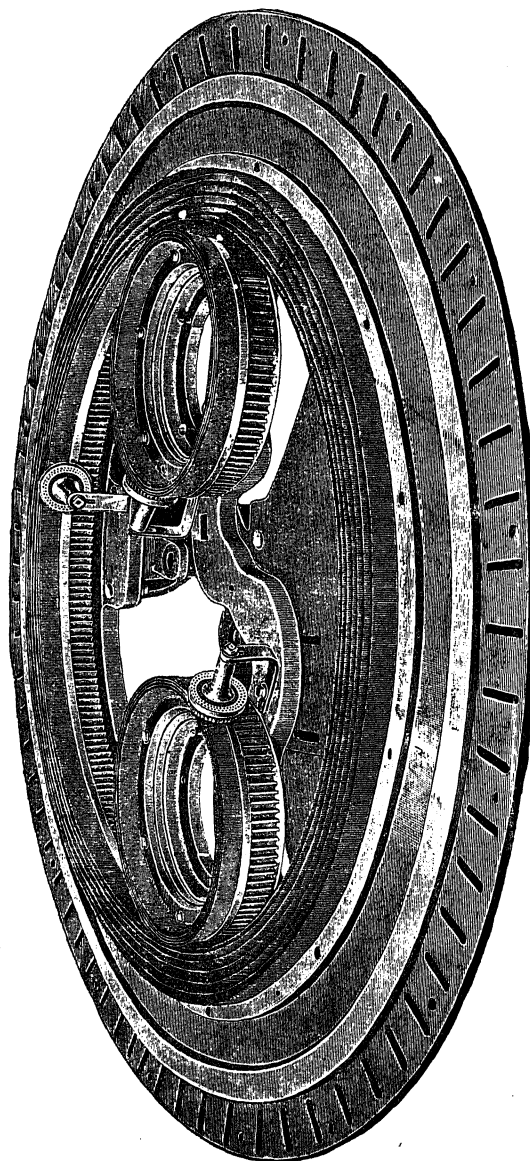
CIRCLES, RACKS, AND RACK PLATE OF NOBLE COMB SHOWING POINTS OF CONTACT AND CLEARING BRUSHES.
